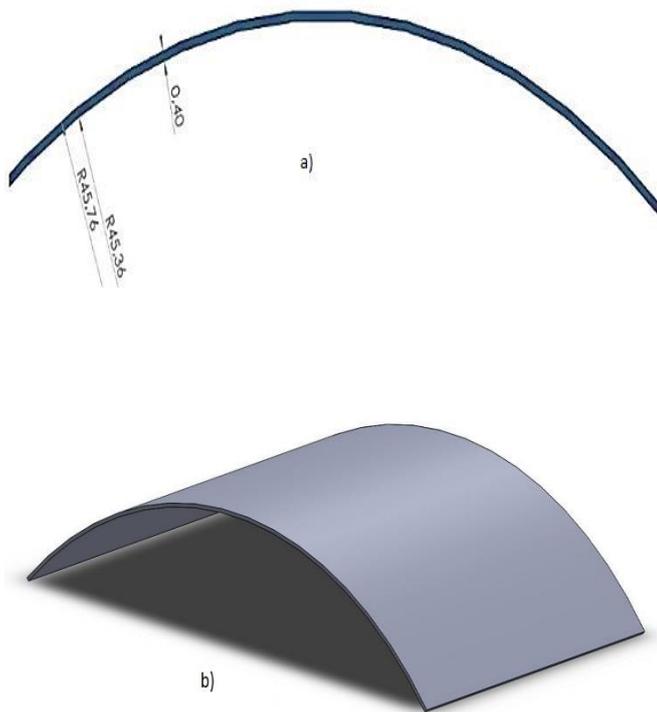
[0/90]₂ reinforced angle glass-epoxy patch; a) front view b) isometric view (Unit: mm).
